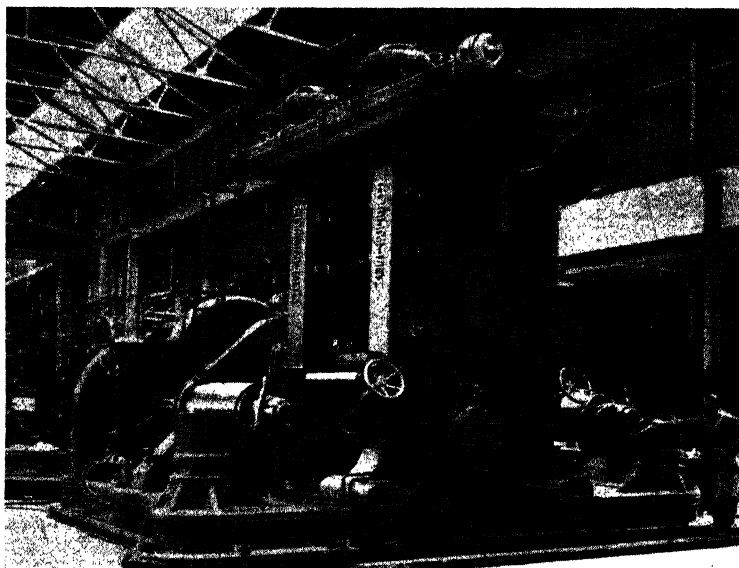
A Four-High Cold Rolling Mill for Strip.
